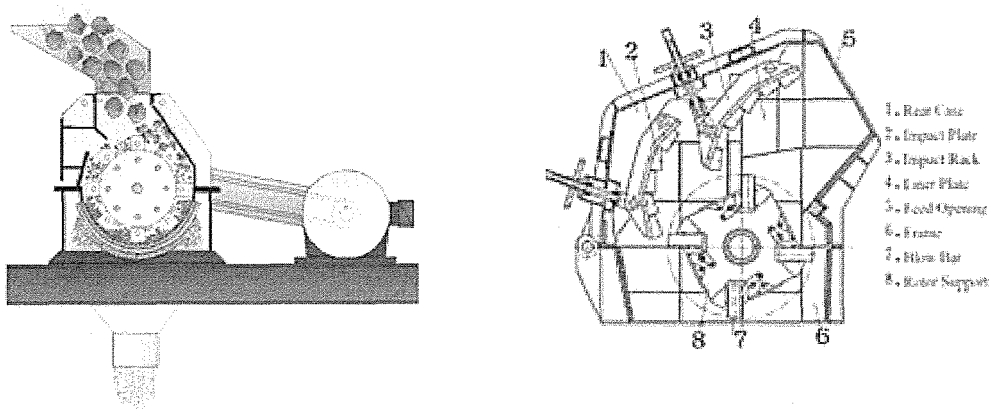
Hammer mill (left) and impact (right) crushers
